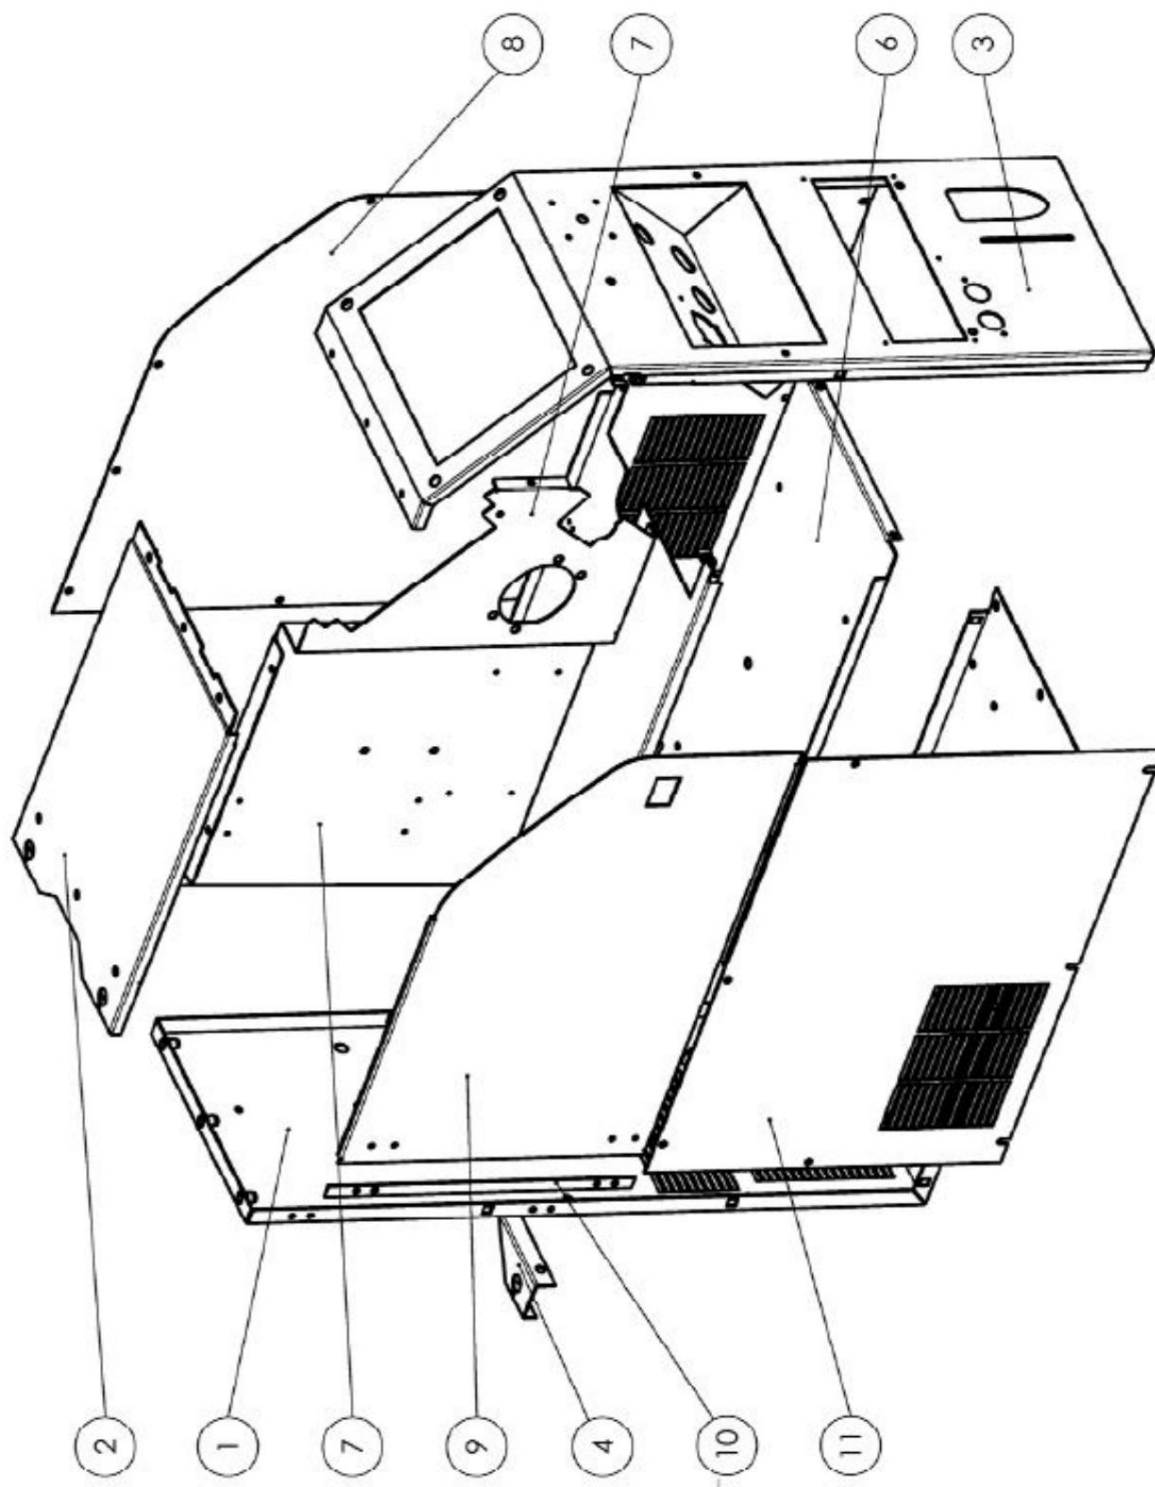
Spare parts drawing 2 - Housing PRO-MIG ARC 404W
